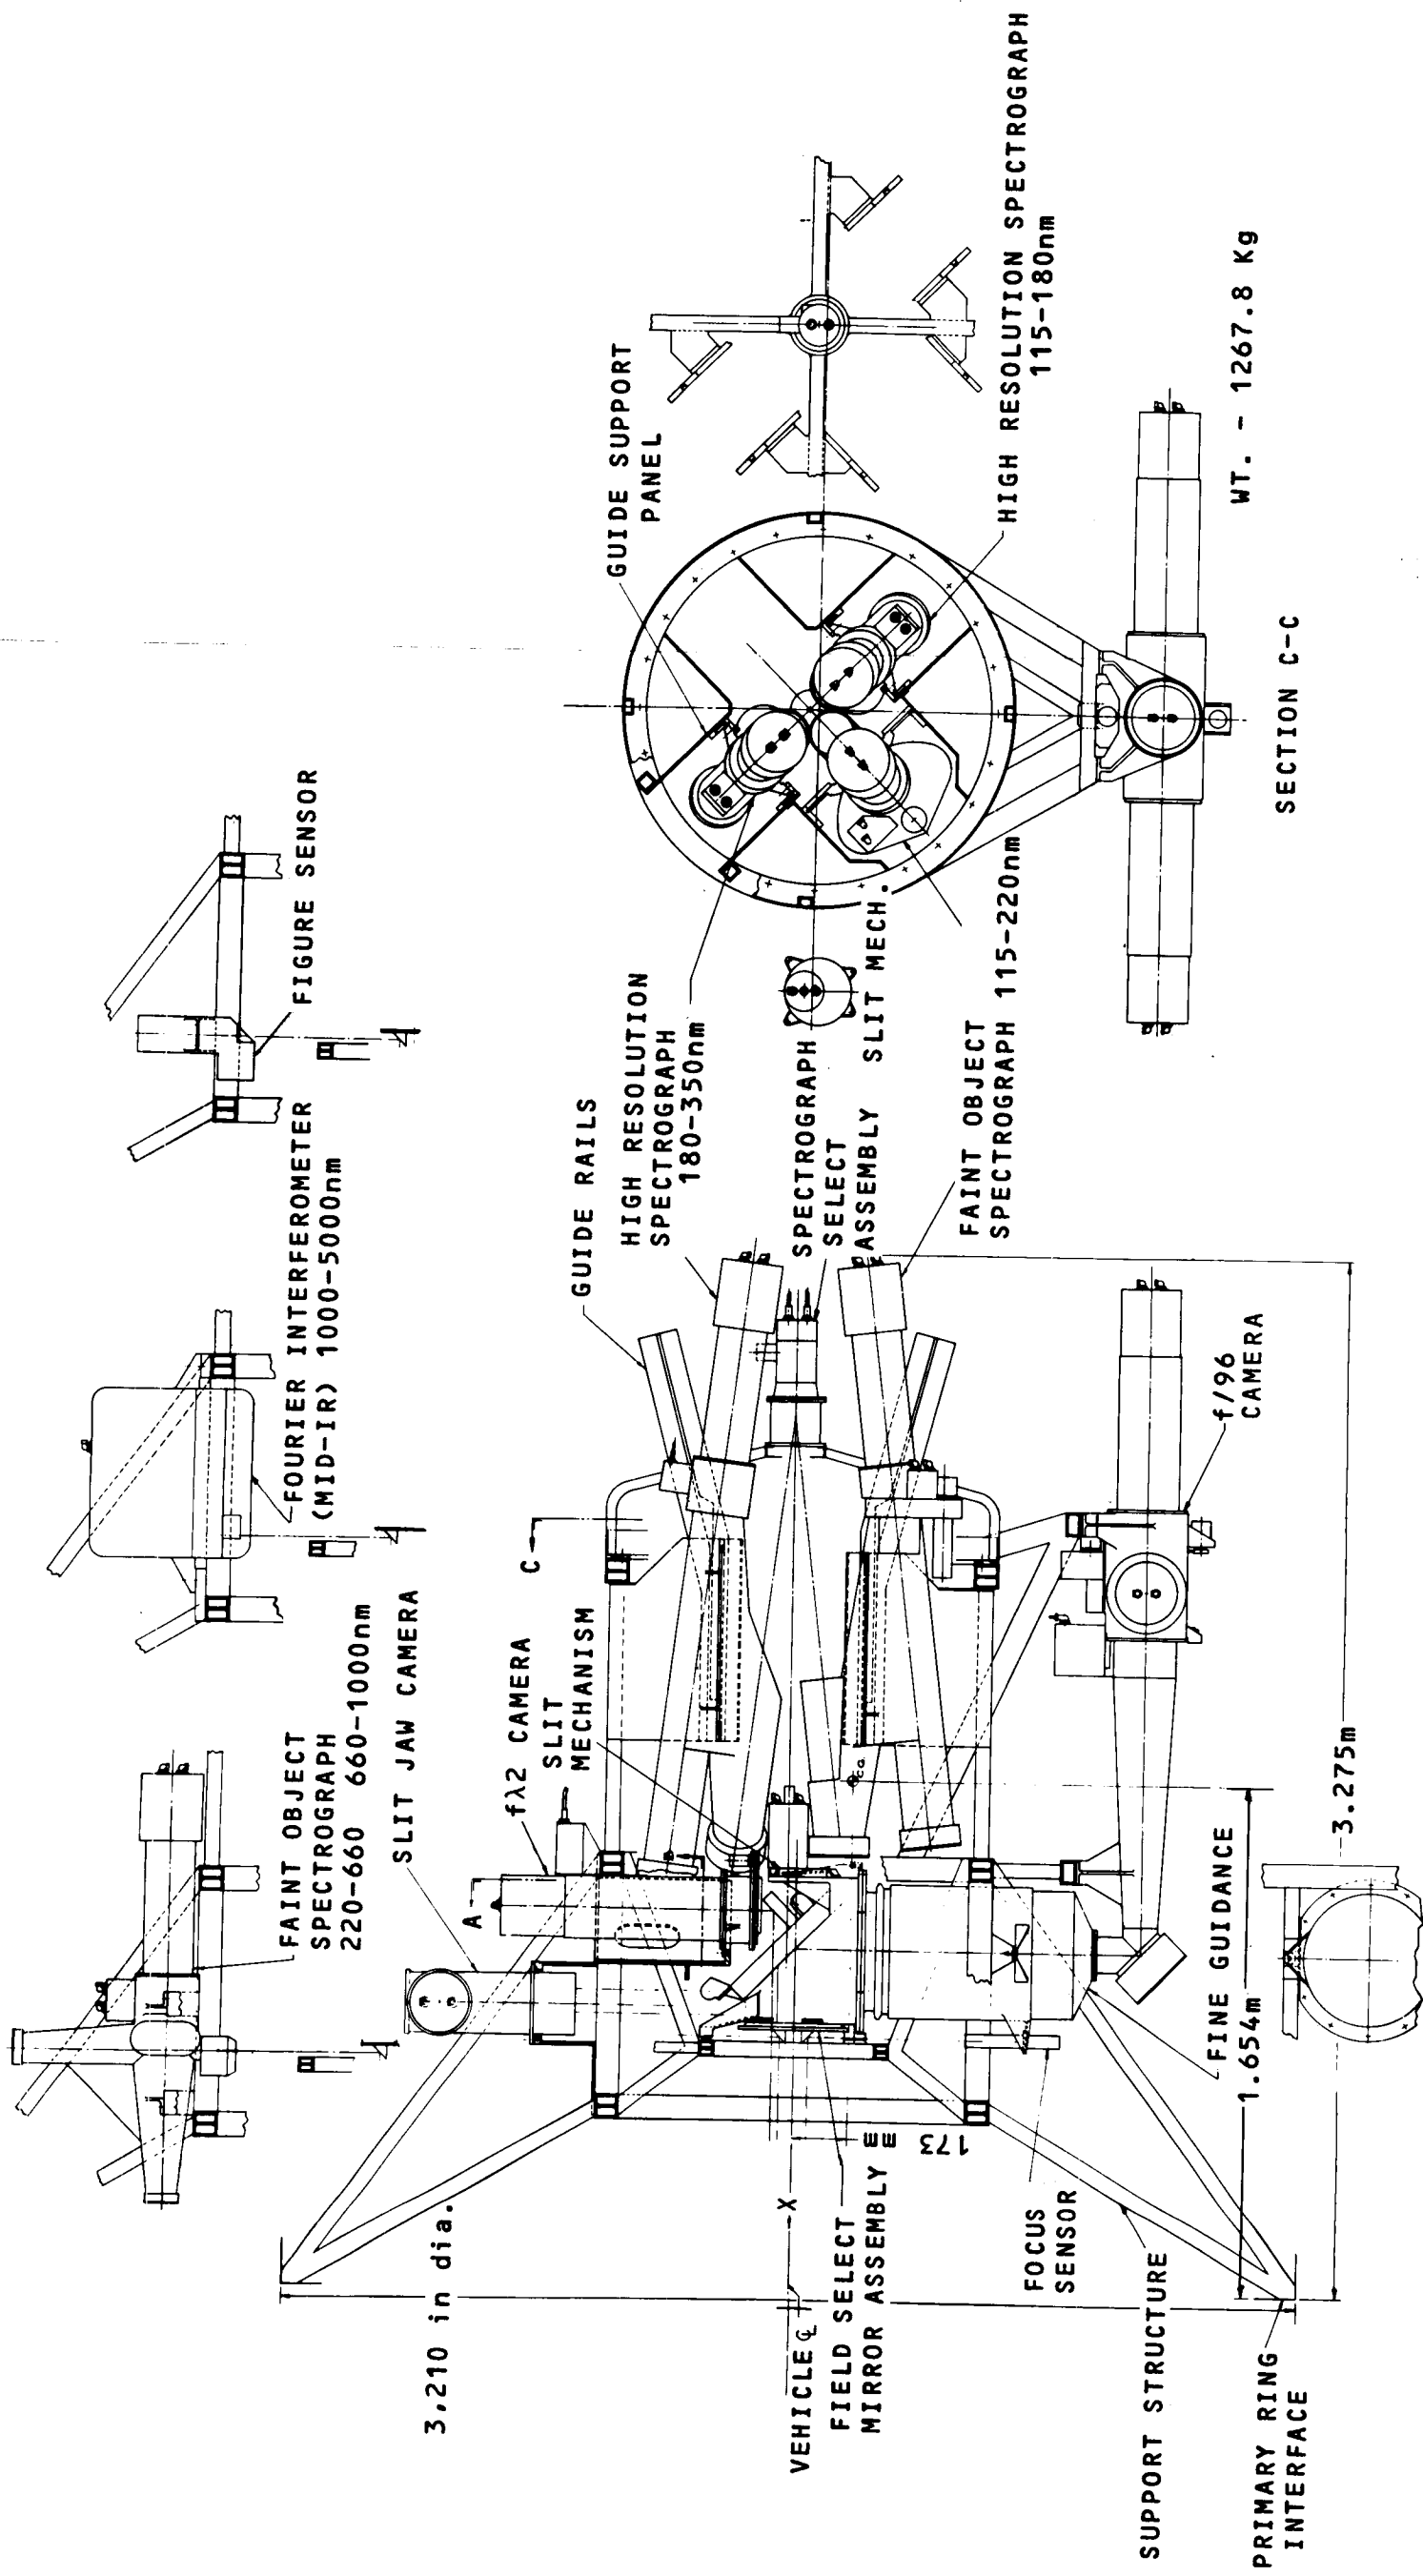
LST-SIP Assembly Layout (Sheet 2 of 2)
